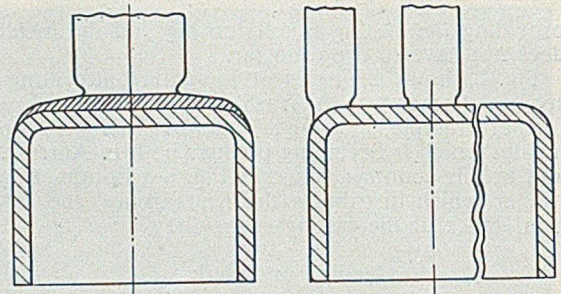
Sketch illustrating the "Shoulder Effect" when designing Feeder Heads.
